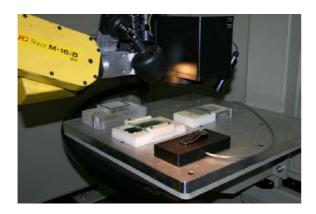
3D welding test setup with various workpiece fixtures
